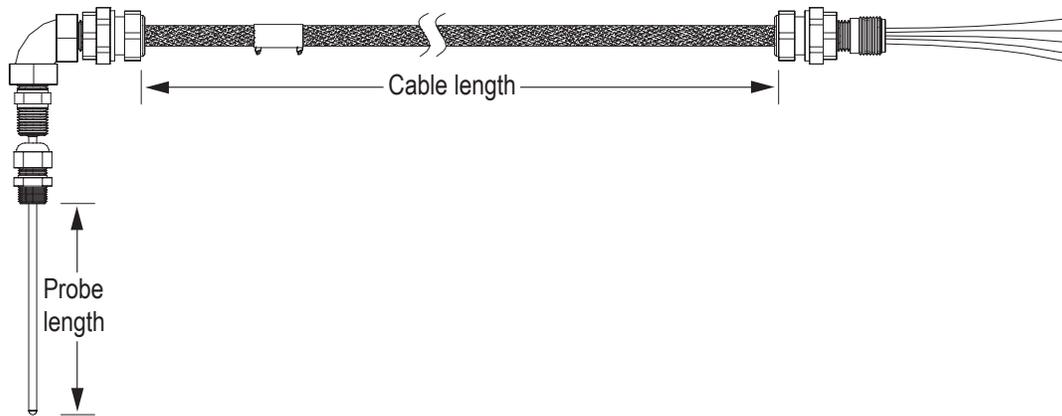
Explosion-proof (Class I, Div. 1) RTD assembly
